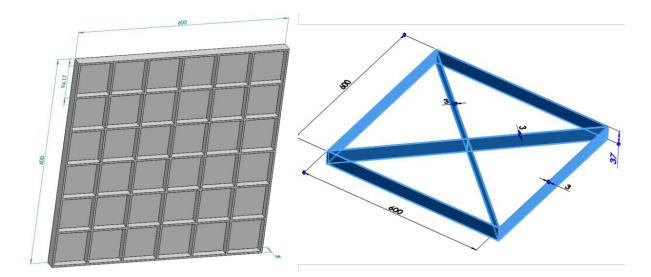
The design of the floor panel (left) and stringer (right) in detail design phrase
